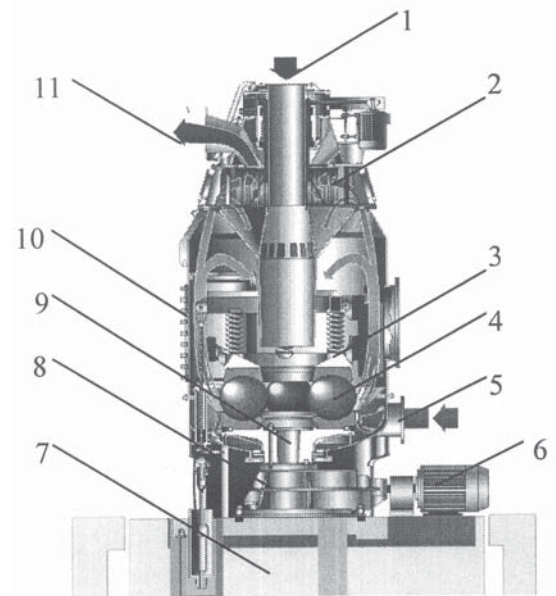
Sectional drawing of a Vertical Ball Race Mill with integrated, dynamic high-efficiency classifier
